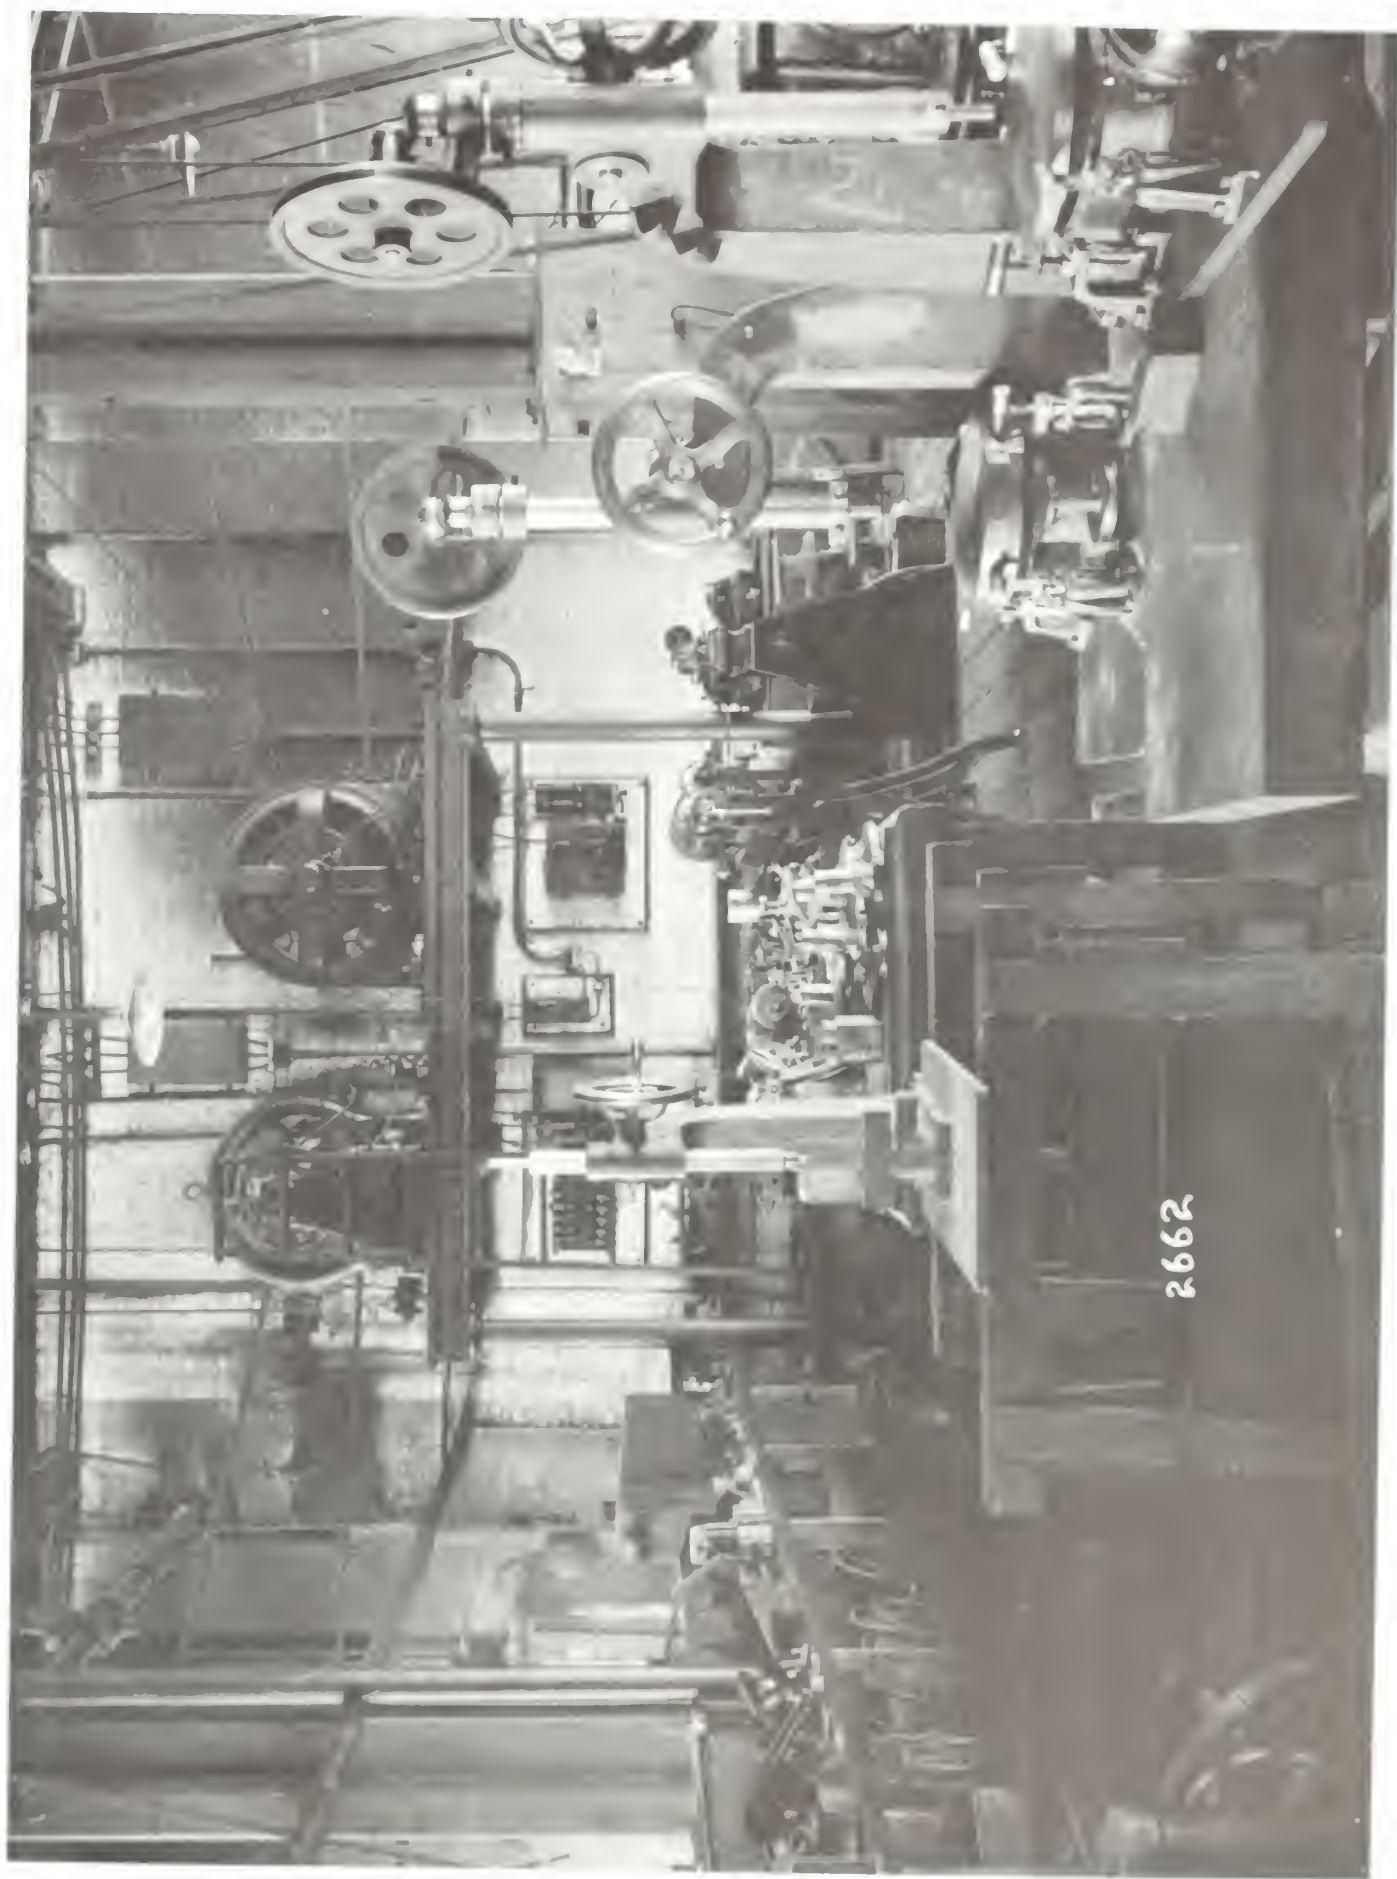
Heavy machine shop, Building 5, east wall, April 1914. Photo no. 10.388/20, neg. no. 2662.
